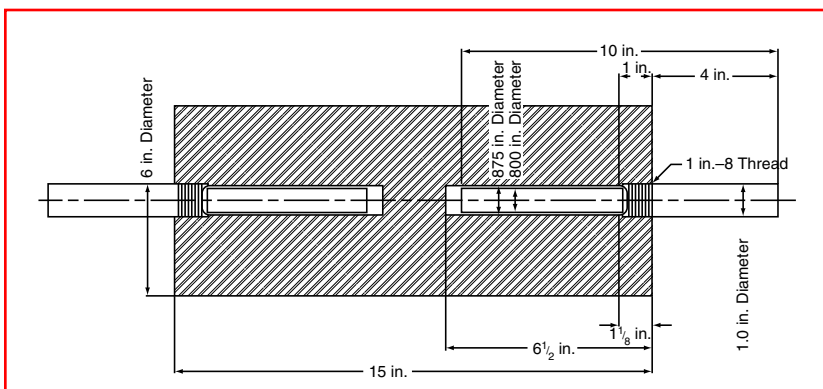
Timken Roller Bearing Company air hardenability test setup. Two test specimens with short threaded sections as illustrated are fixed in a large cylindrical bar. (From C.F. Jatzcak, *Trans. ASM* 58:195–209, 1965.)
